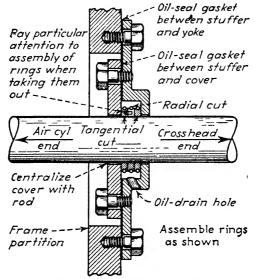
Piston-rod oil-wiper rings in frame partition.
